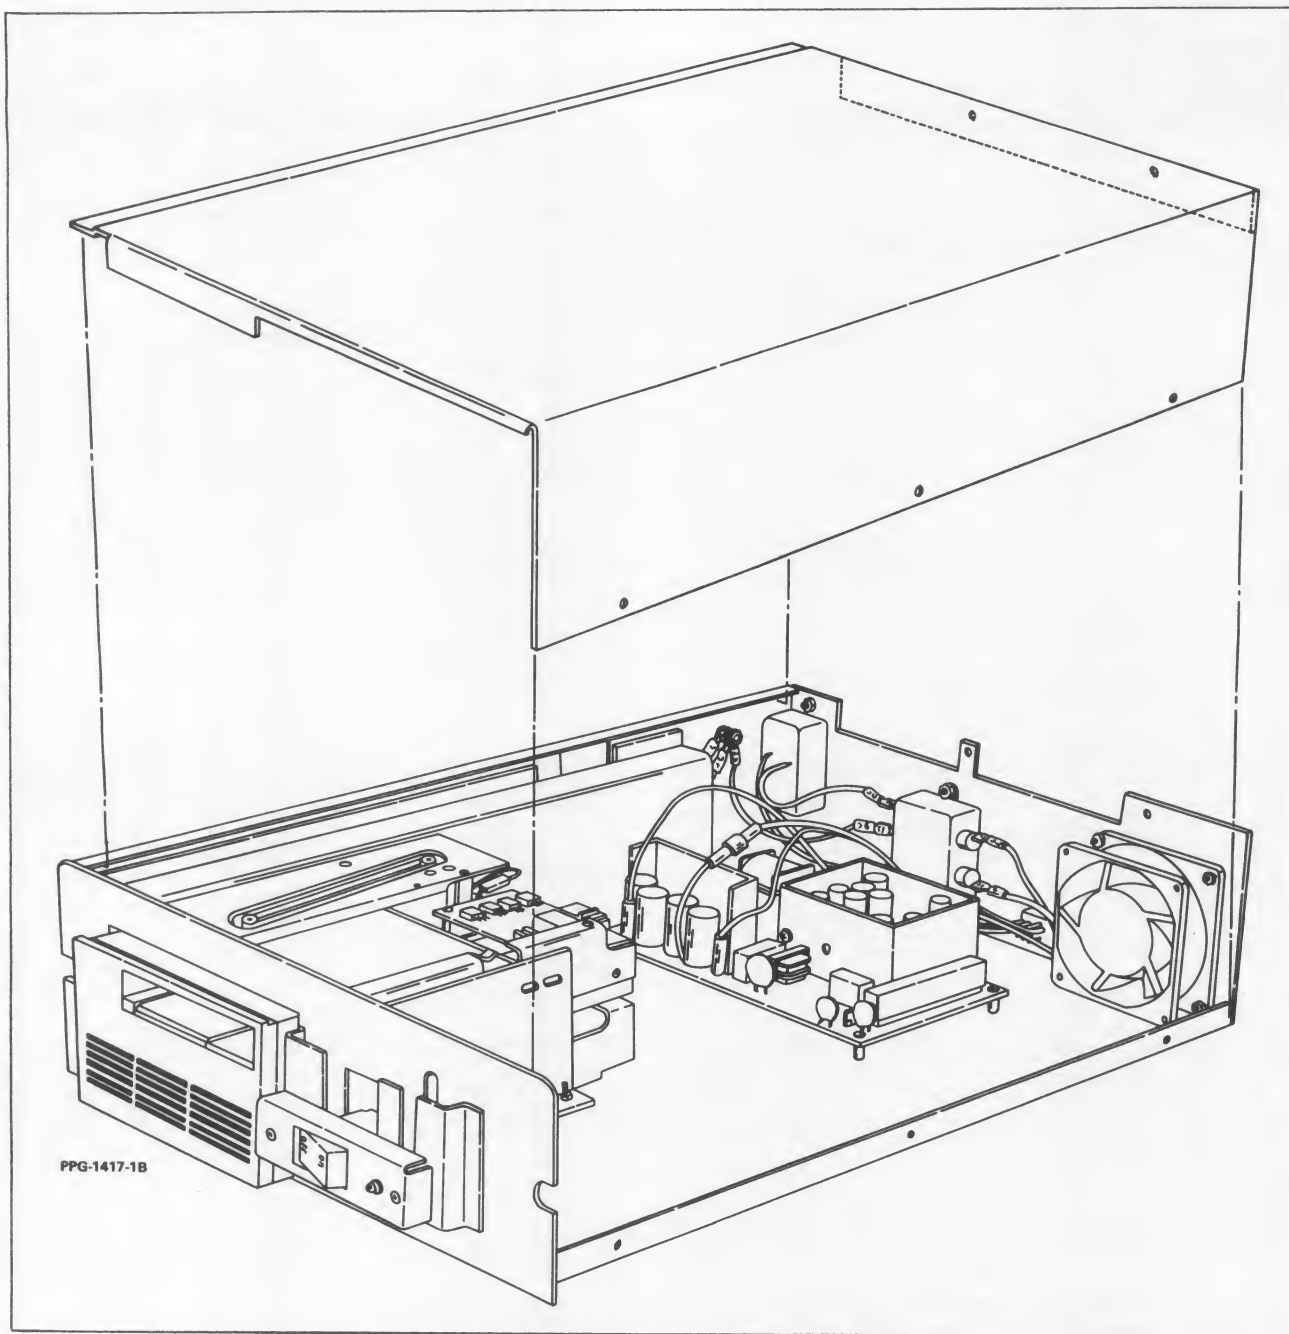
Removal of Tape Cartridge Drive Enclosure Top Cover
